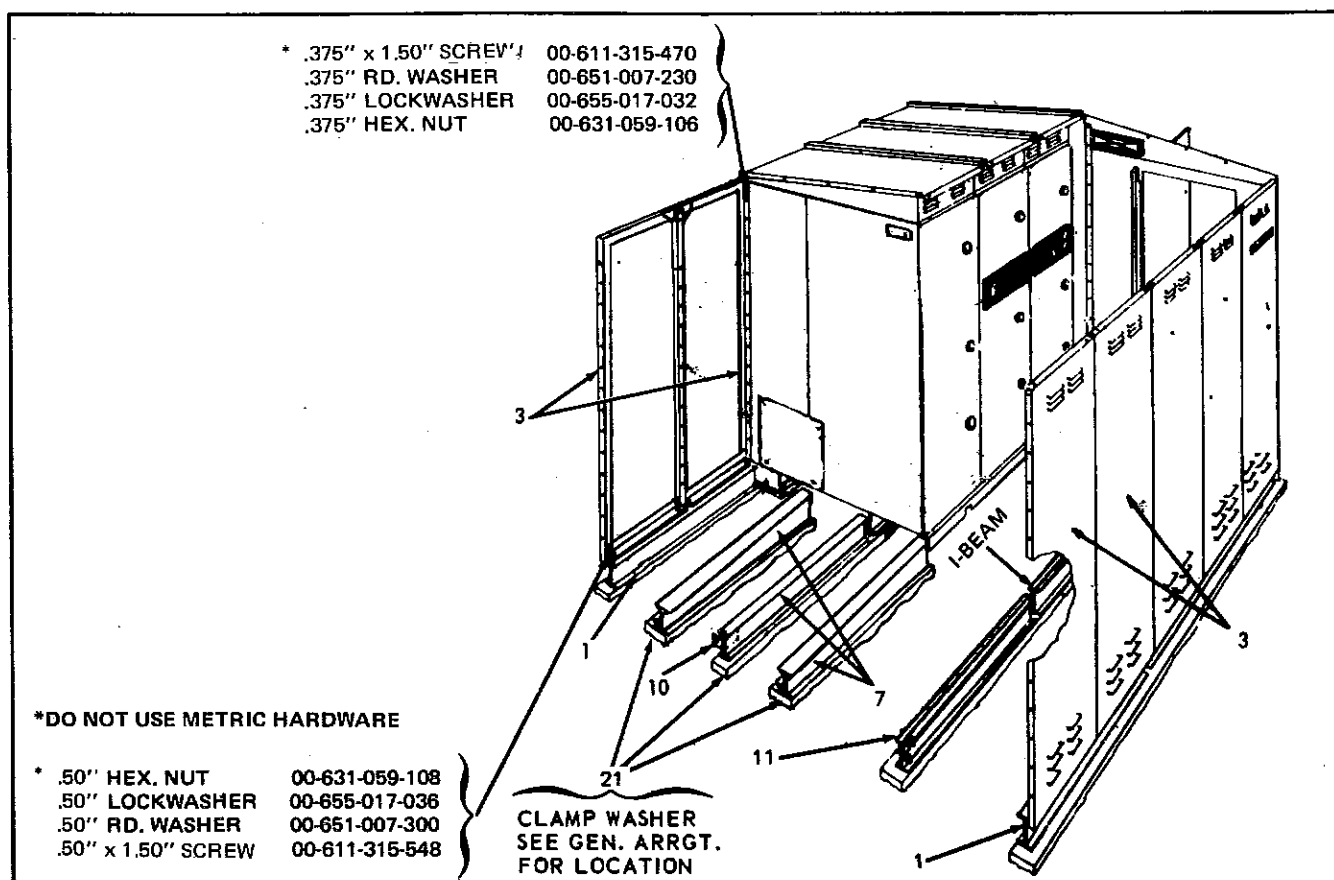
Beam Placement (15 kV) – Single Aisle with Work Space
